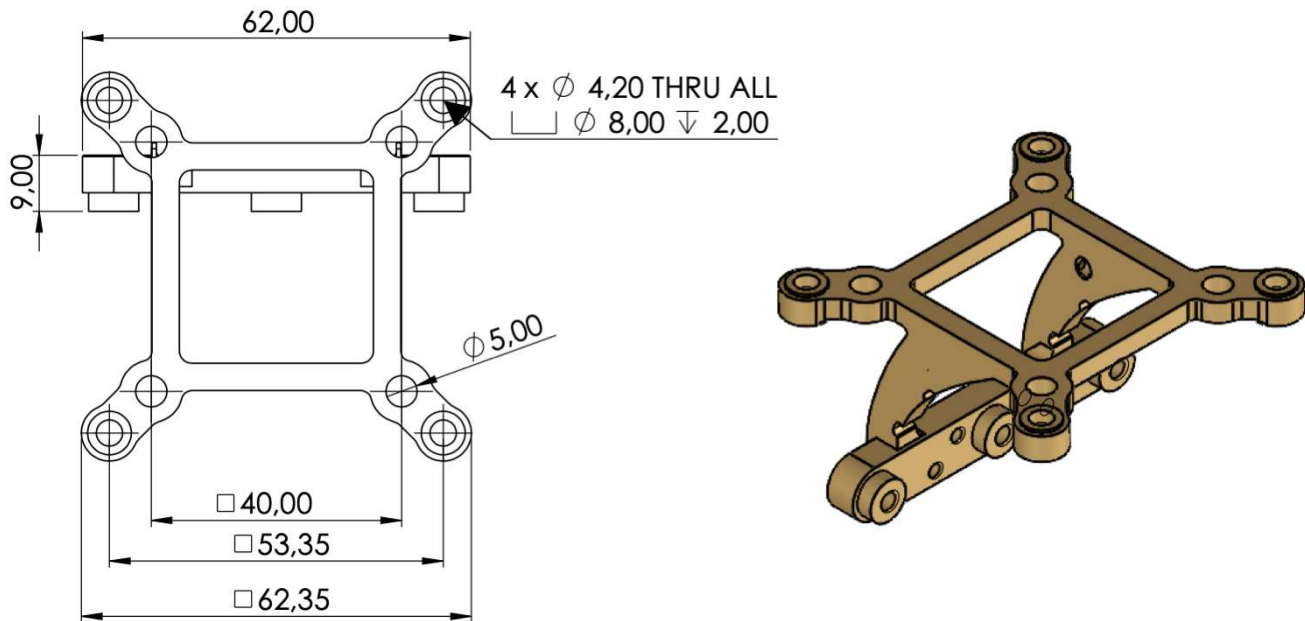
Left) Schematic of the QCage holder. Dimensions in mm and identical in horizontal and vertical direction. Right) Side view of the QCage holder.
